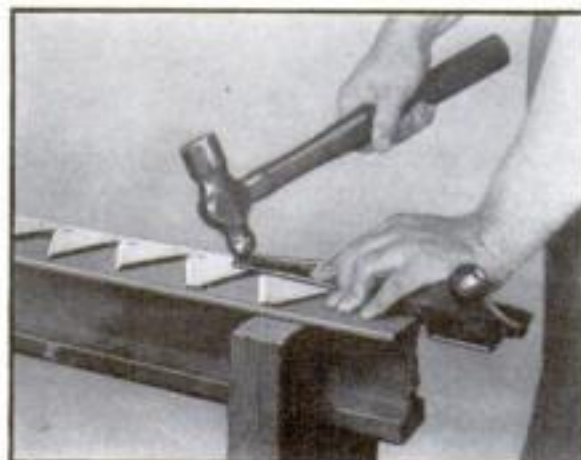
Tightening rivets on the head of a sickle bar. The anvil is a railroad rail
